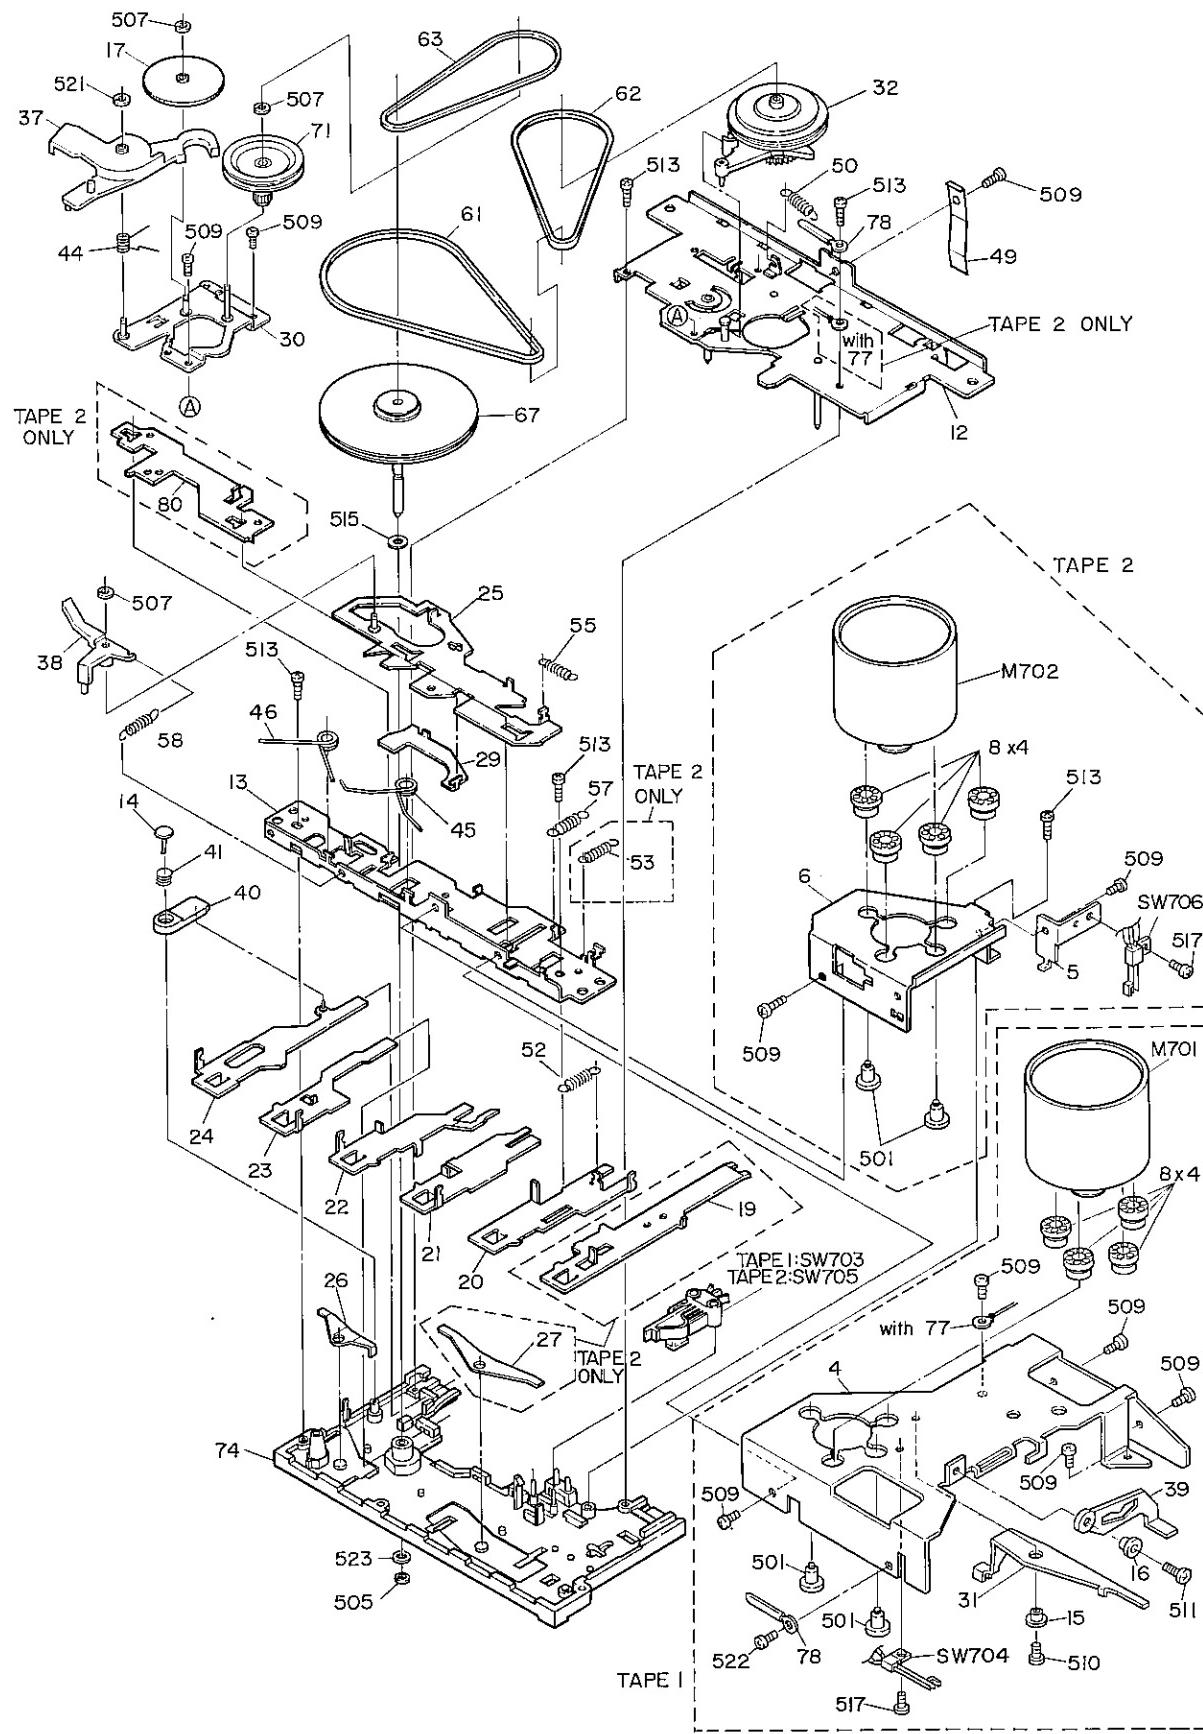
TAPE MECHANISM EXPLODED VIEW (2/2)
